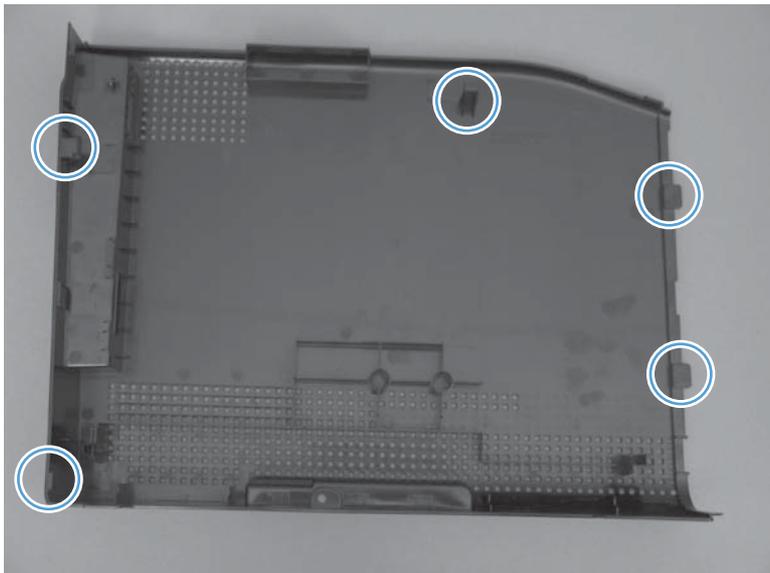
Remove the print-cartridge drawer (5 of 5)
